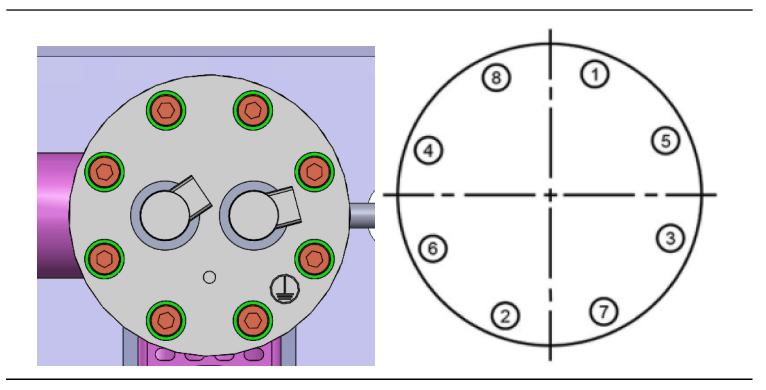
Heater Housing End Cap - M8X1.25X30 SHCS - Qty 8
